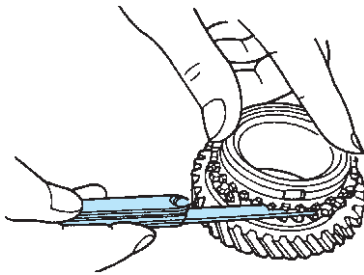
When the cone is pushed against the gear, there should be a minimum amount of clearance between the blocker ring and gear clutching teeth (feeler gauge). (Courtesy of Ford Motor Company)
